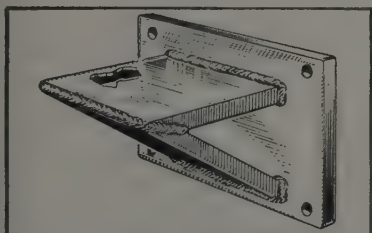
For heavy loading, the cantilever arm is made from channels flame-cut to shape and welded.
